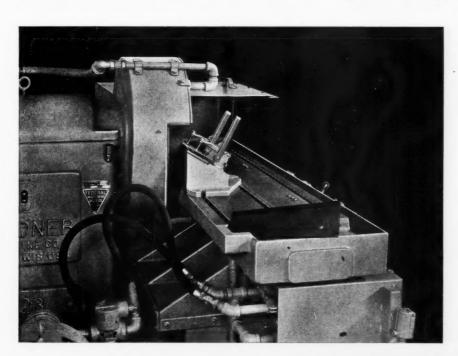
Both straight and angular edges of hay knives are ground by mounting various fixtures on table of this single-spindle disc grinder
